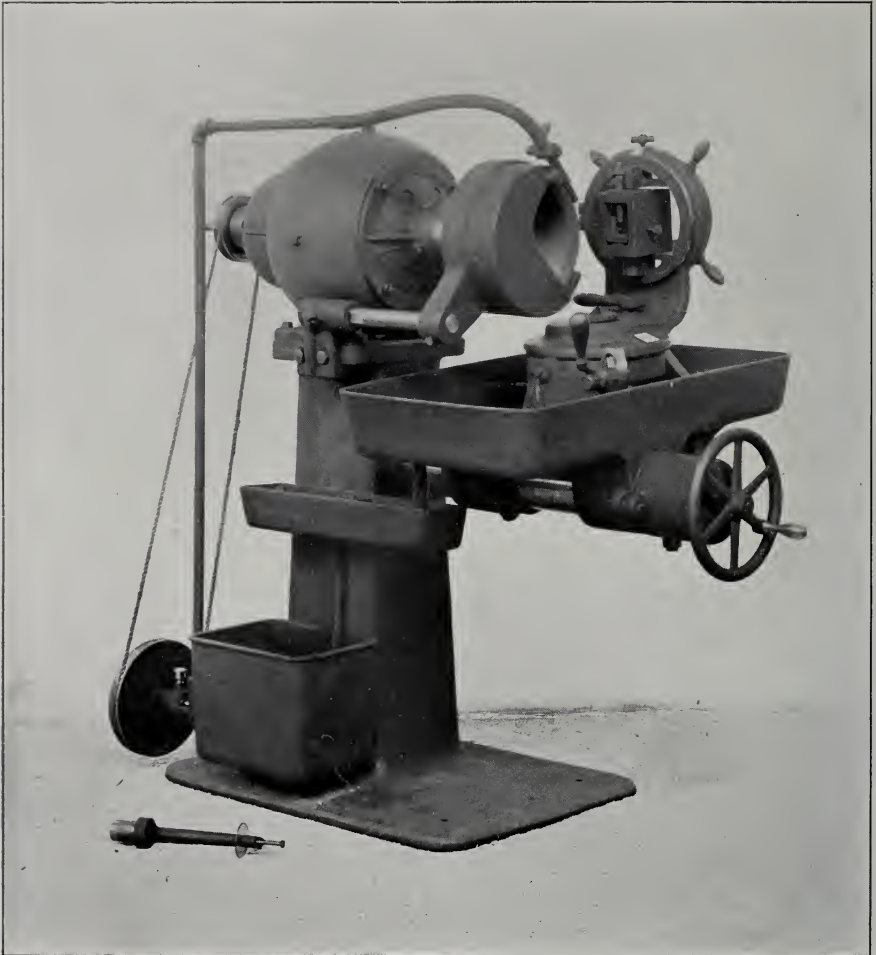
AN ELECTRICALLY DRIVEN GRINDER MADE BY THE GISHOLT MACHINE CO.,
